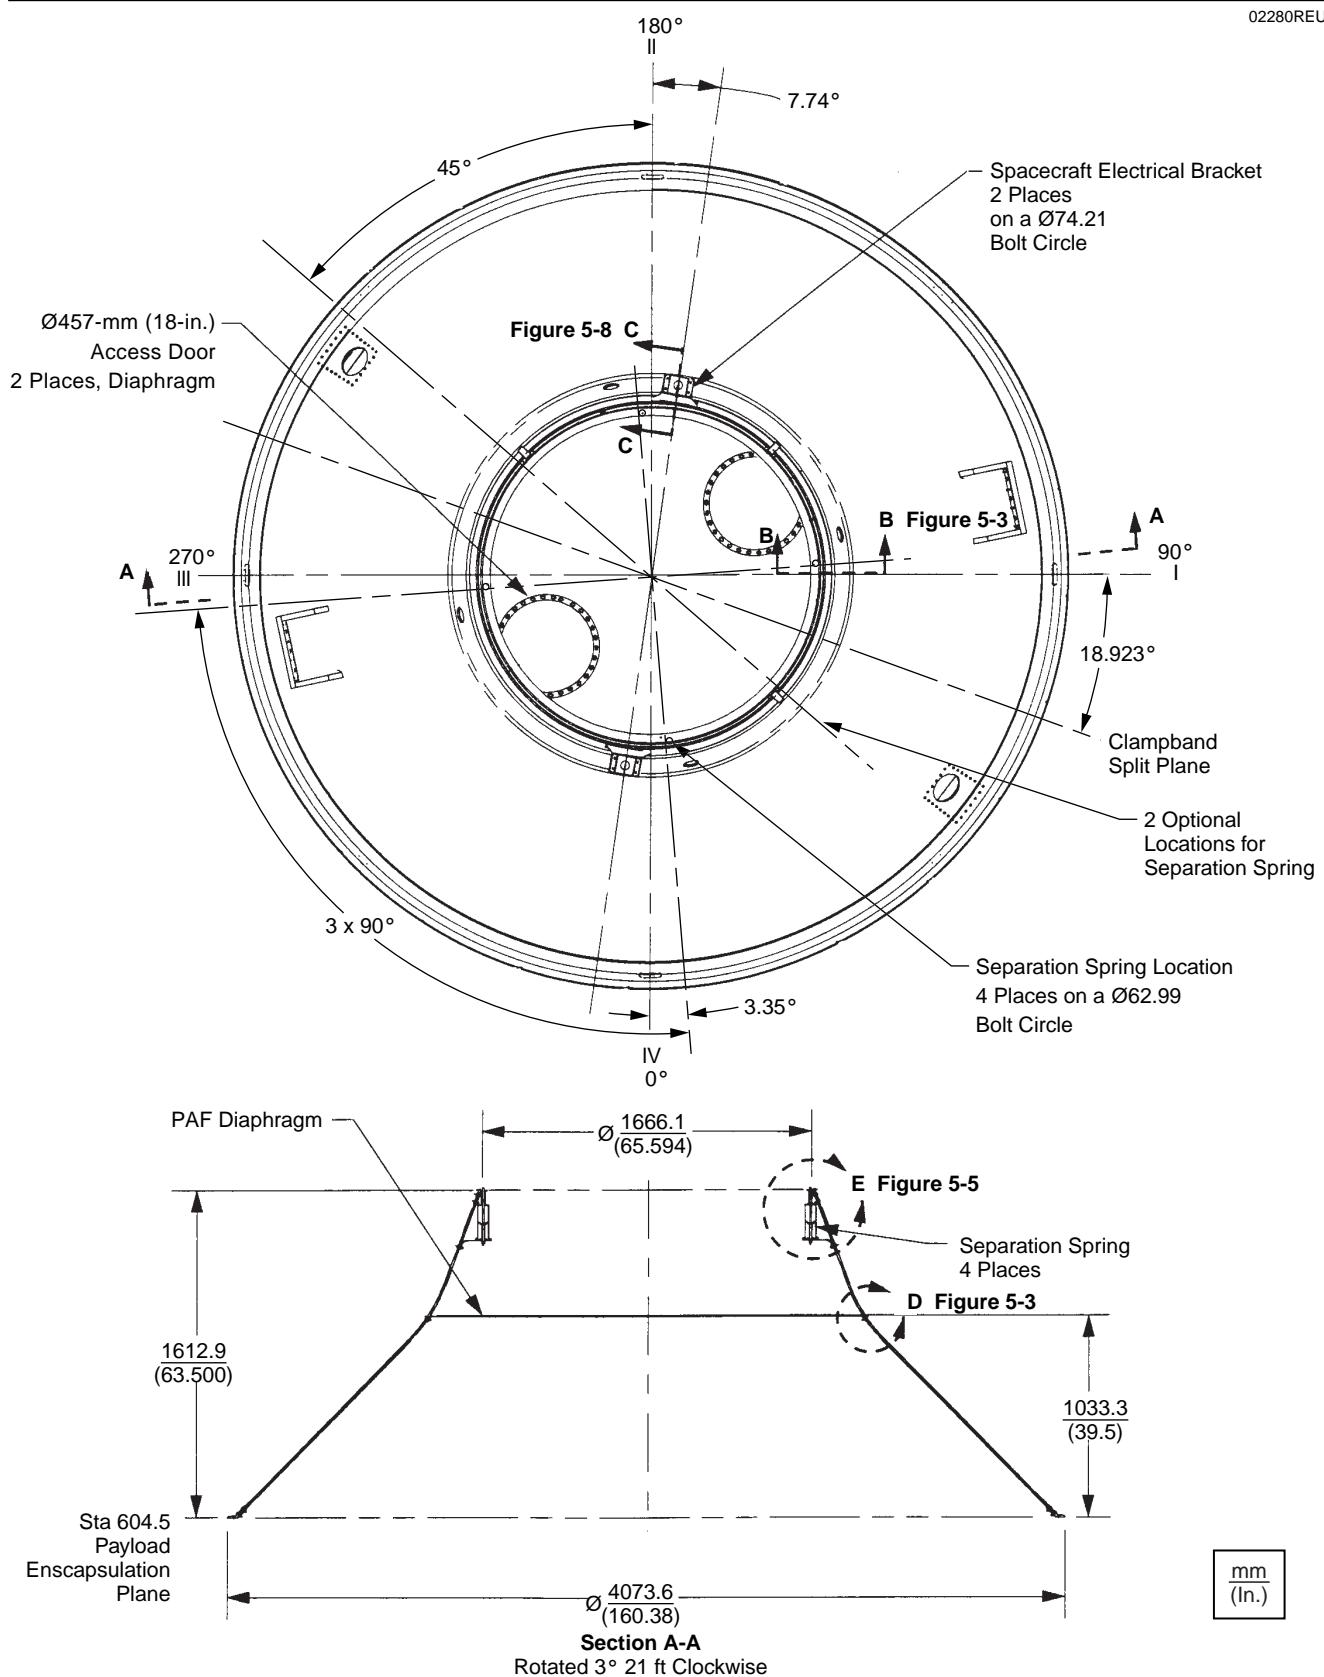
Delta III 1666-4 PAF Detailed Assembly
